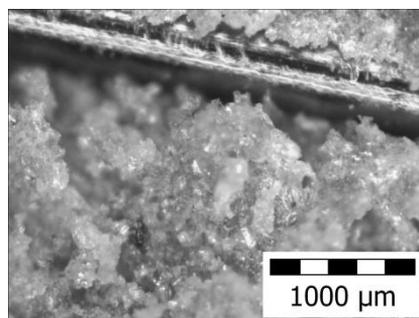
Failure area of destructive tested adhesive bond after reaching entire hardening.
